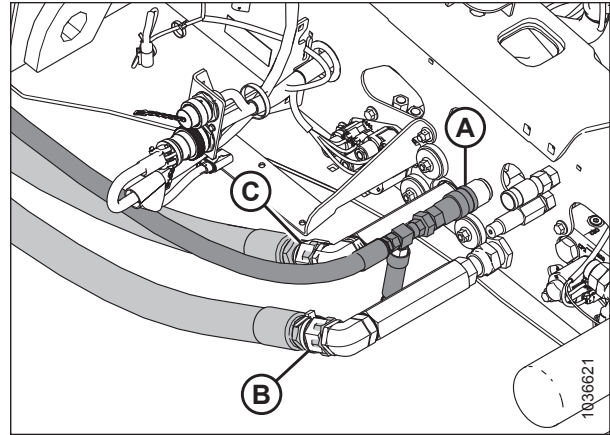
Header Drive Hydraulics – M1240, Rotary Disc Configuration with Hard Plumbed Fittings
